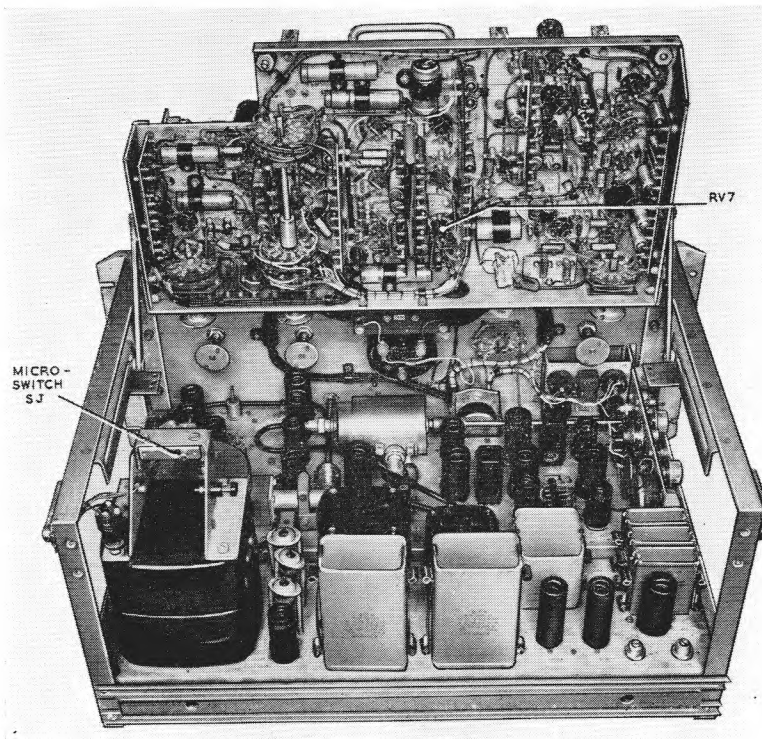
Test set, radar, 4339: rear view with top chassis raised
